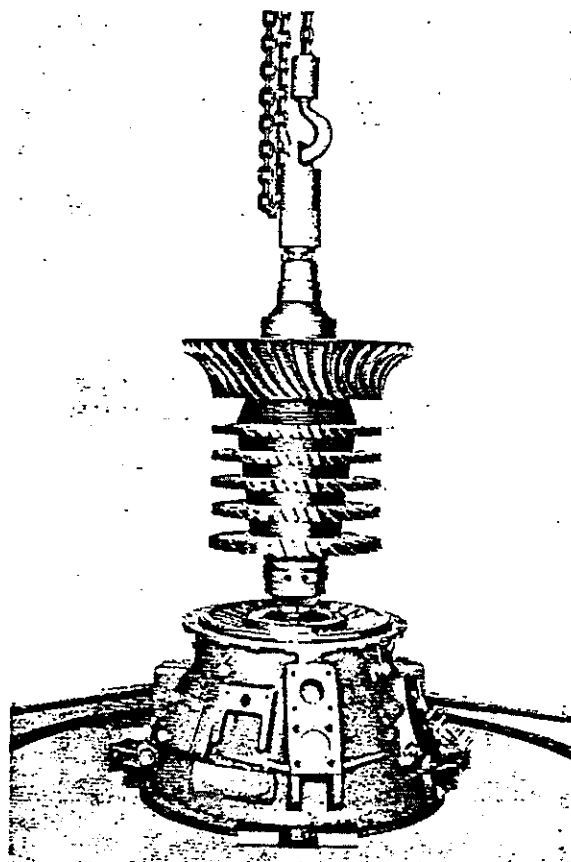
Removing Compressor Rotor from Inlet Housing
